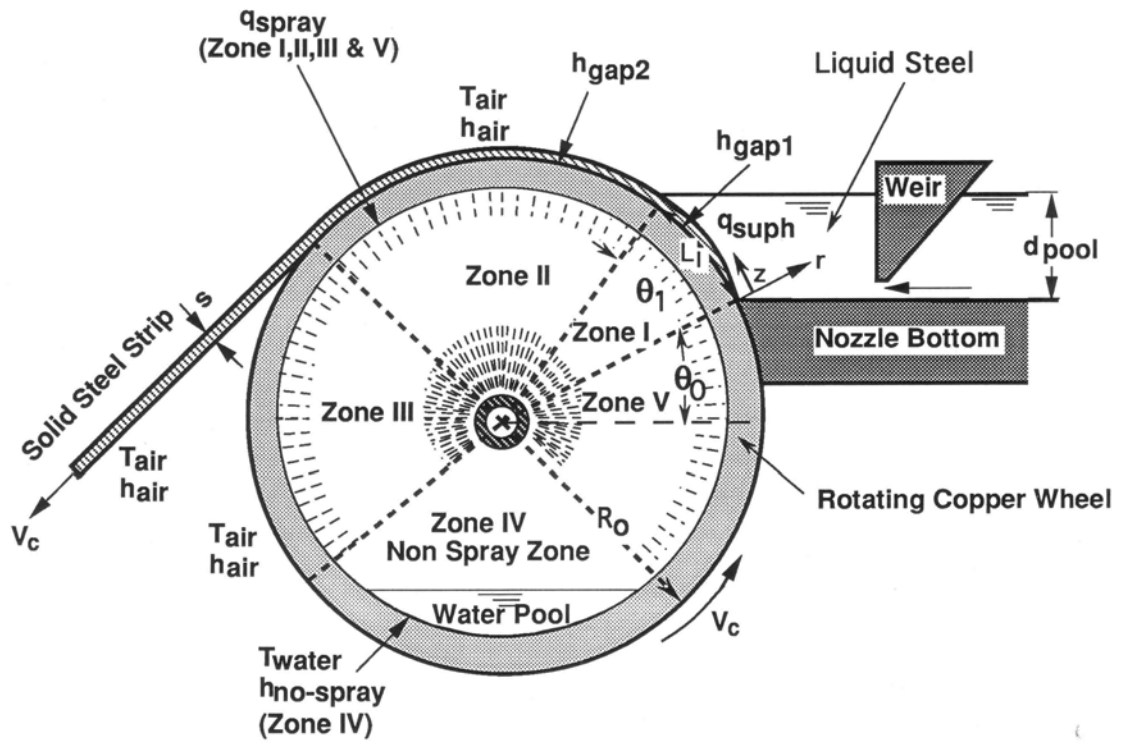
(a) Schematic of Single-wheel Thin Strip Casting Process
